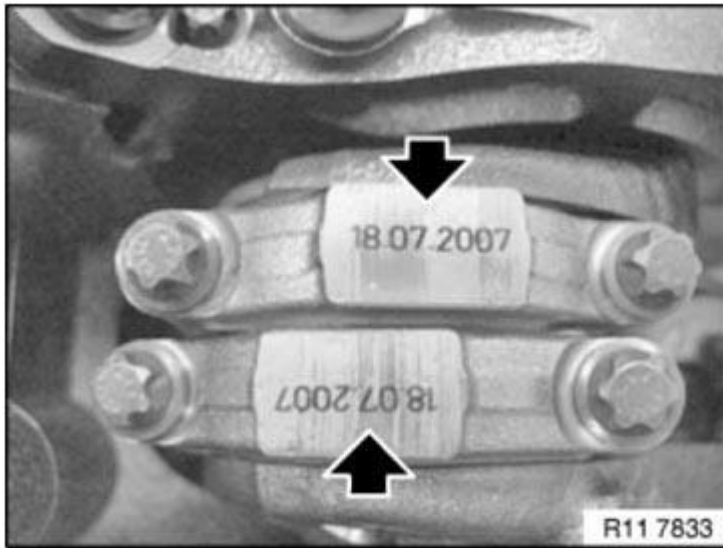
Locating Connecting Rod Bearing Caps Stamped Dates
